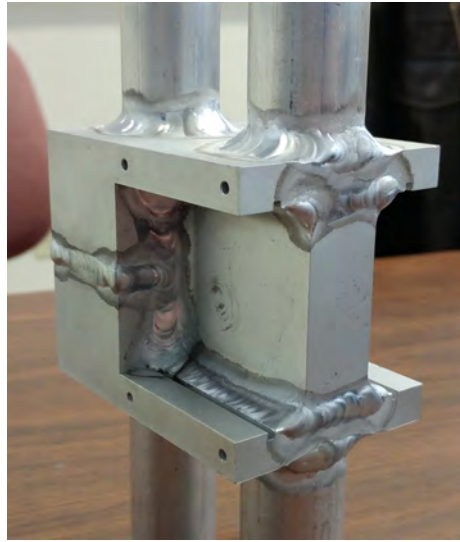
Complete Fabrication of the Photoneutron Converter including the Welded Cooling System
